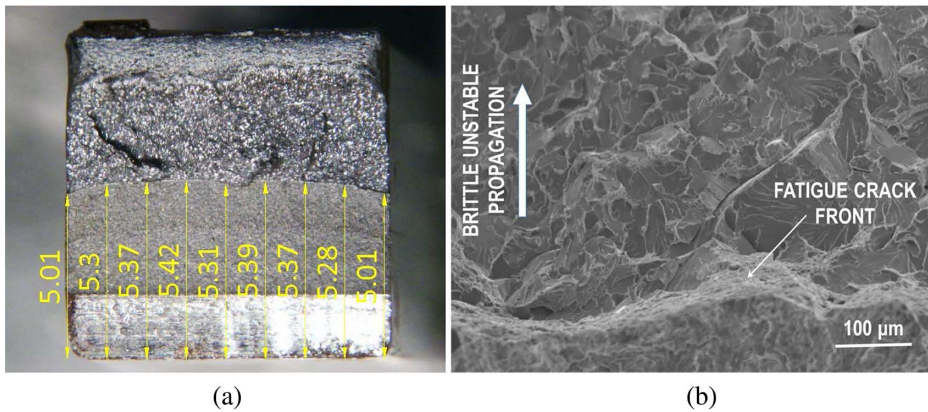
(a) Measurement of the crack length in a PCCv standard specimen and (b) fractography showing the crack front after precracking and the region of brittle fracture, dominated by cleavage micromechanisms.
